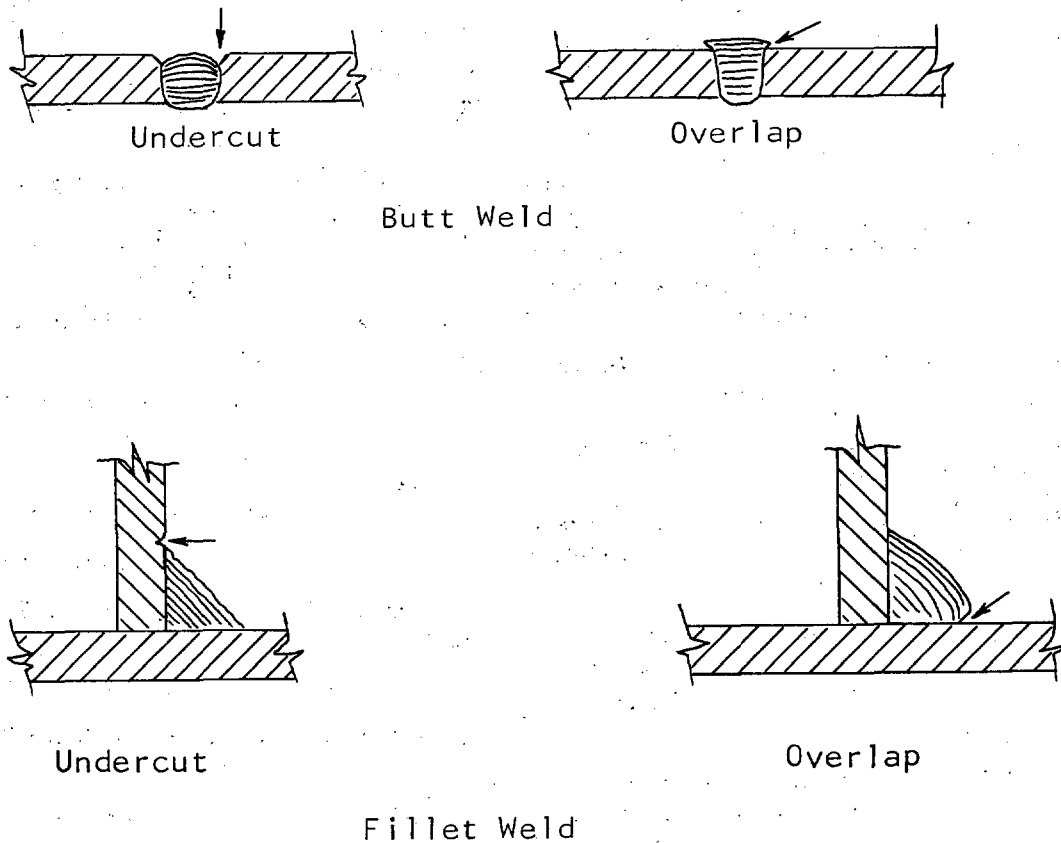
Undercut and Overlap in Fillet and Butt Welds
